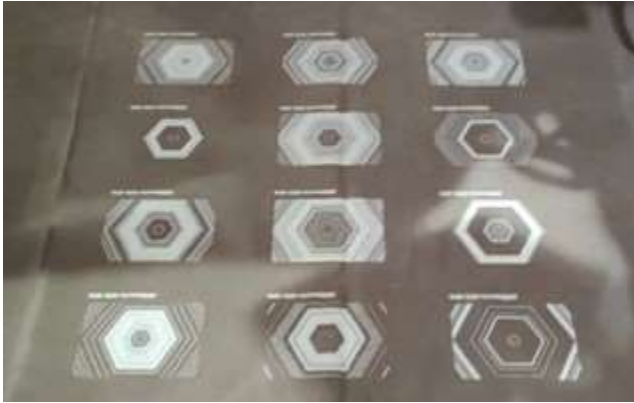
Hexagonal patterns that are engraved for prototyping and testing for laser engraving settings. © Authors
